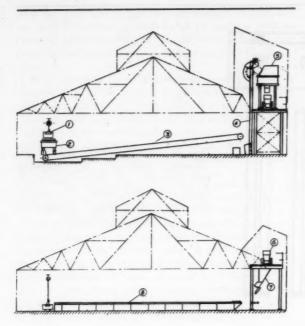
Sand handling layout; (1) box for poured molds; (2) vibrating shake-out; (3) magnetic belt conveyor; (4) bucket-loader; (5) mixer with dust hood; (6) distributing buggy; (7) molder's hopper; (8) roller conveyor.
